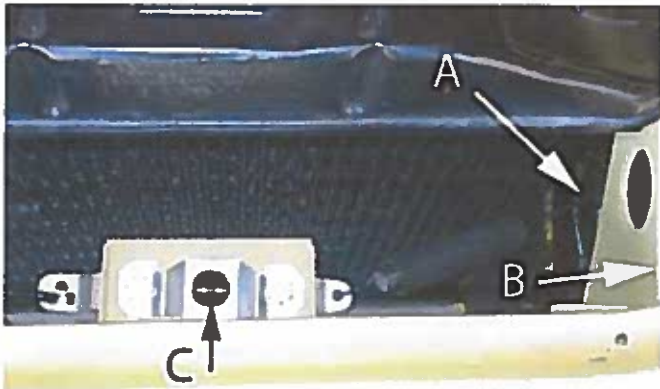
This view, looking down through the latch on a 6-cylinder Healey, shows the fully open hole (C) where the striker pin will pass. The end (A) of the latch spring will be hooked back to a small hole in the outside edge of the radiator brace (B) after lateral adjustment of the striker pin is completed.
